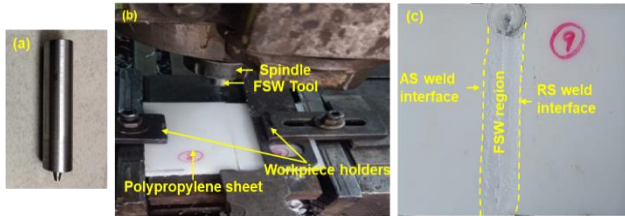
(a) H13 FSW Tool, (b) Experimental setup, (c) Friction Stir fabricated specimen.
